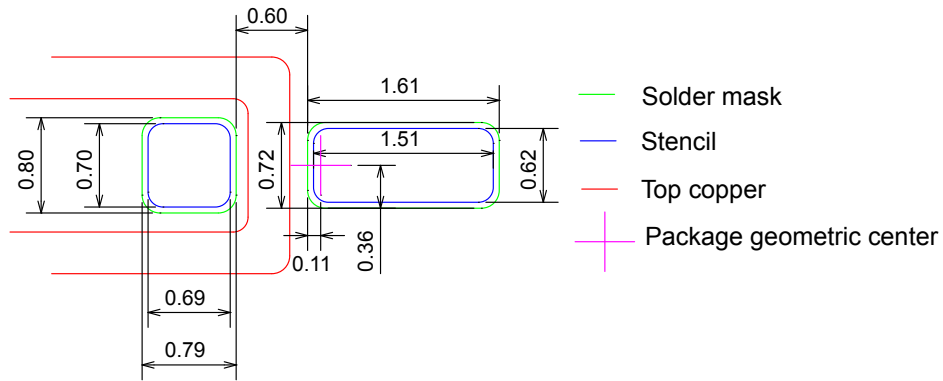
Recommended PCB solder pad layout for LUXEON 3014 with FreshFocus Technology.
